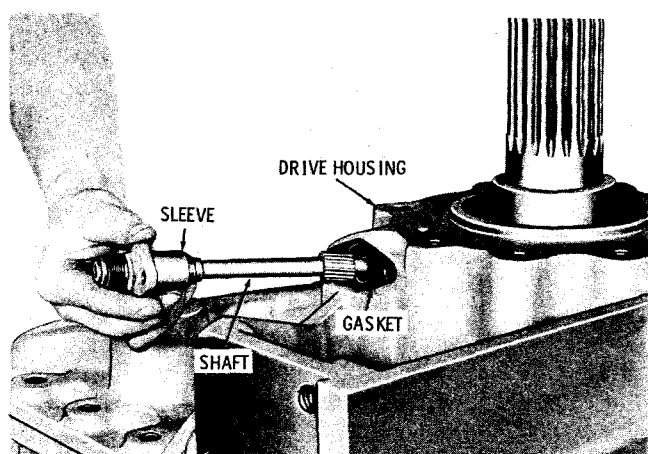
Installing speedometer drive shaft assembly S1679
